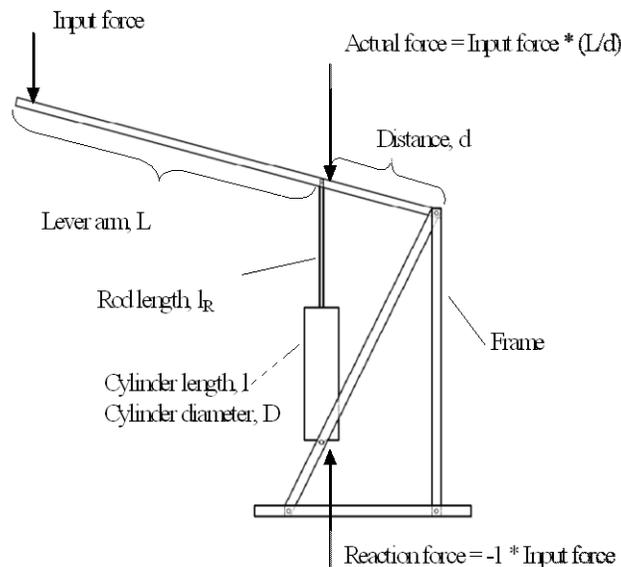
Right side view of the piston and stand; forces and dimensions to be determined.
